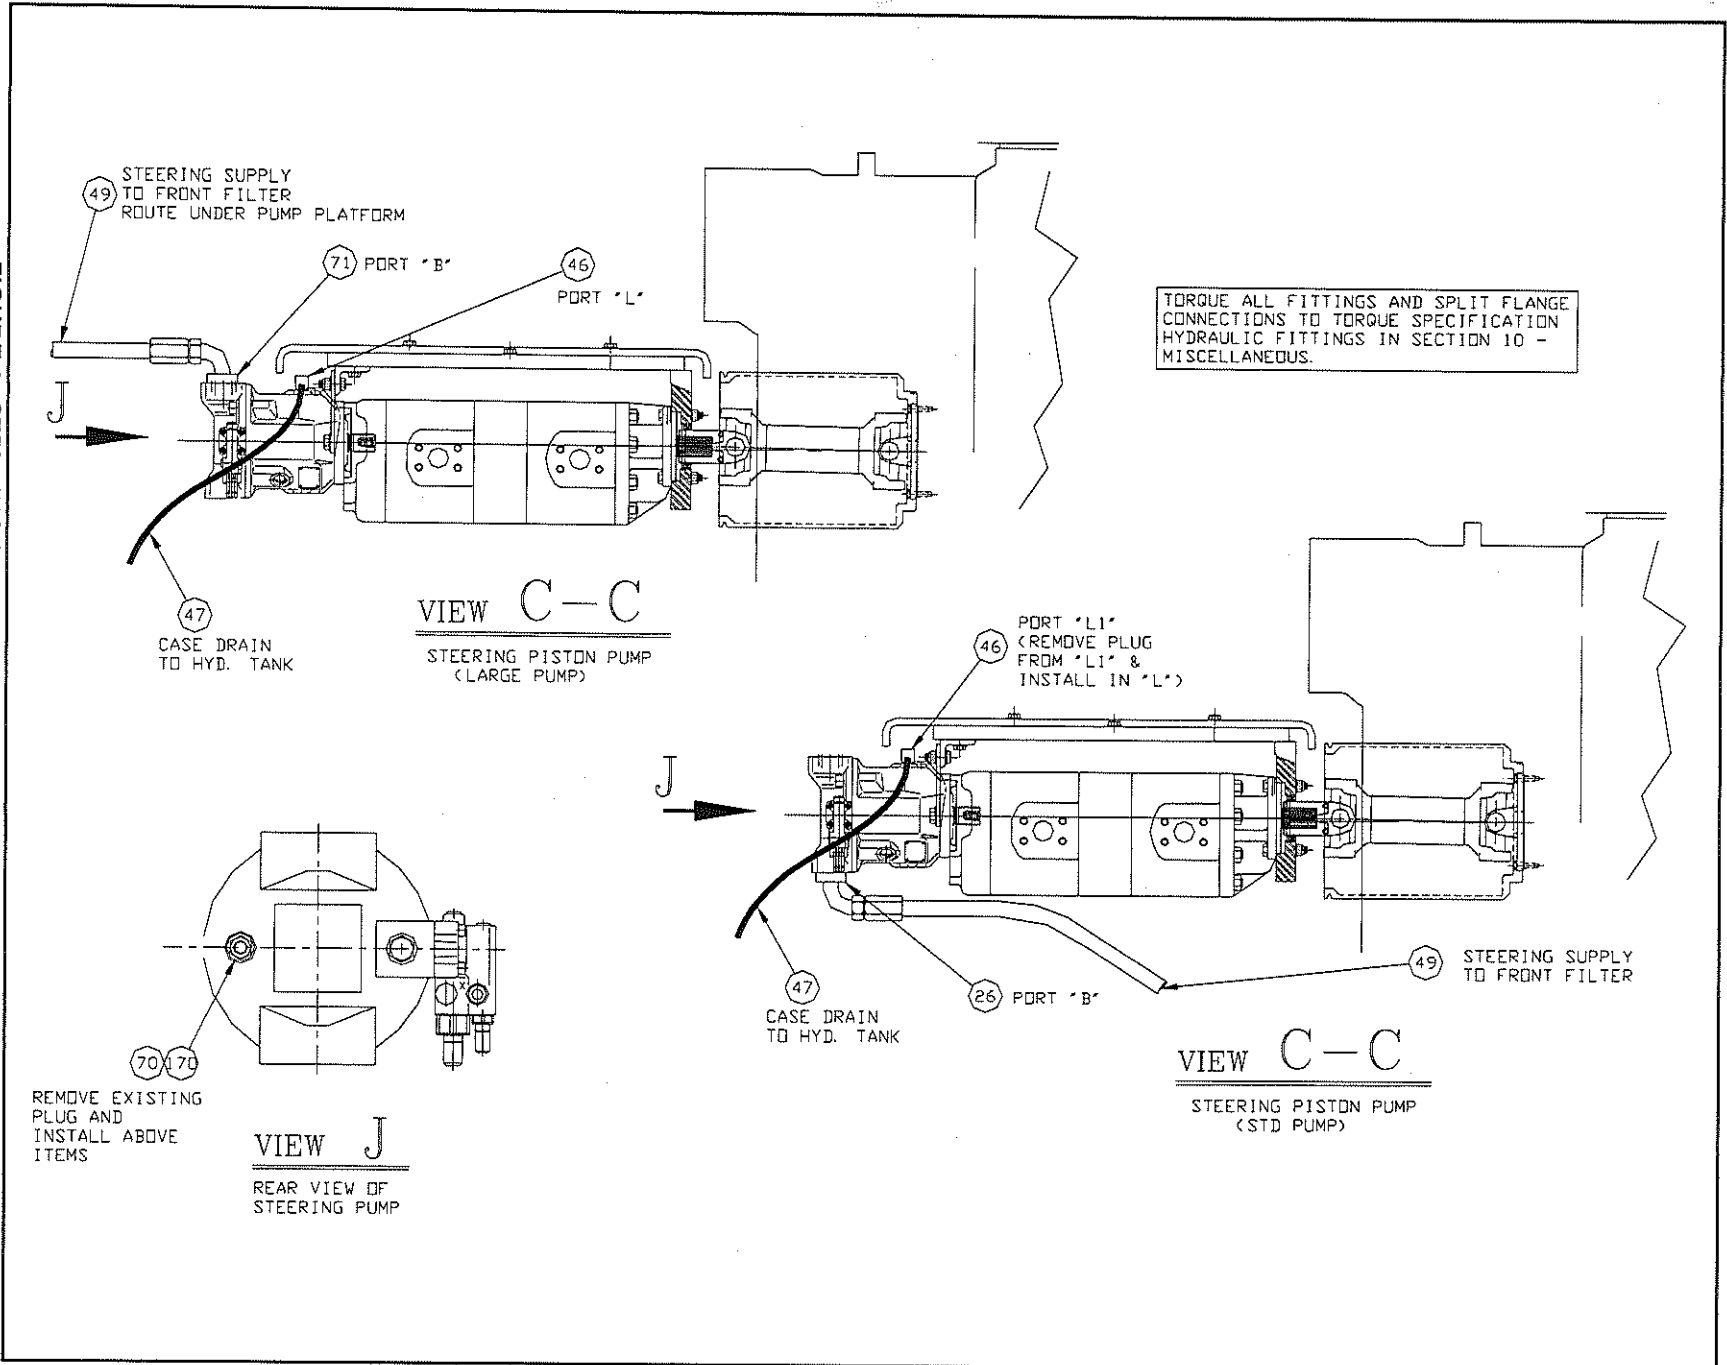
STEERING SYSTEM ASSEMBLY (A85180, SHEET 9 OF 9)
